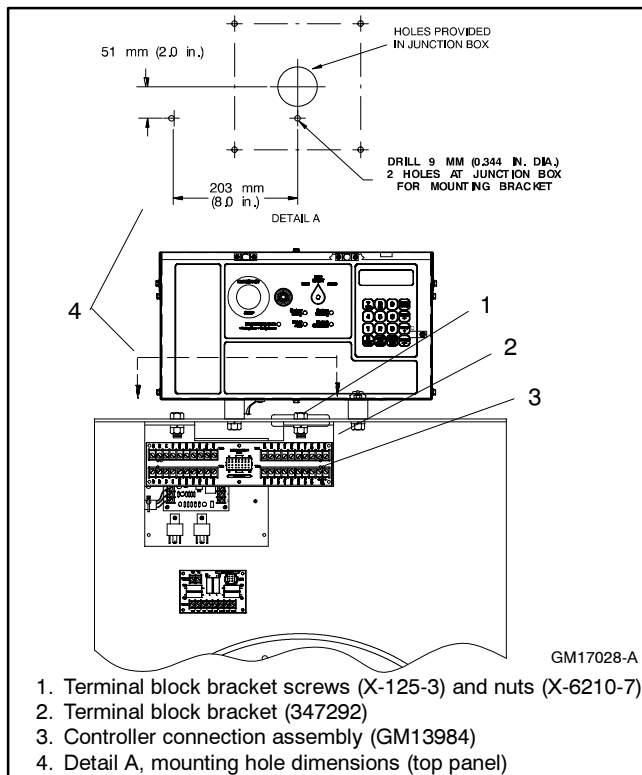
Terminal Block Bracket and Controller Connection Assembly Mounting (350/400 kW)
